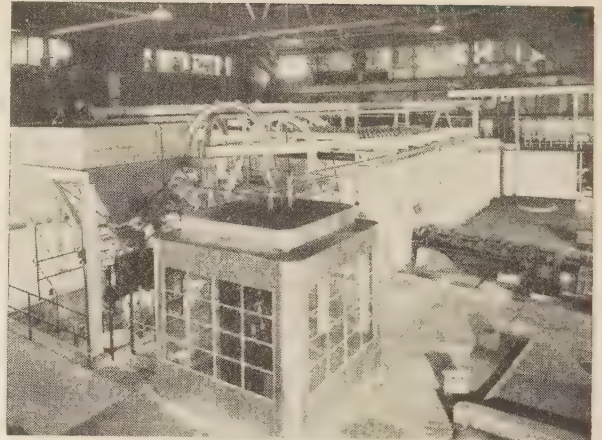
CONTINUOUS RAIL-HEATING FURNACE SHOWING UNIT COAL-PULVERIZER PLANT, AUTOMATIC TEMPERATURE AND PRESSURE CONTROL, AND PANEL ENCLOSURE
